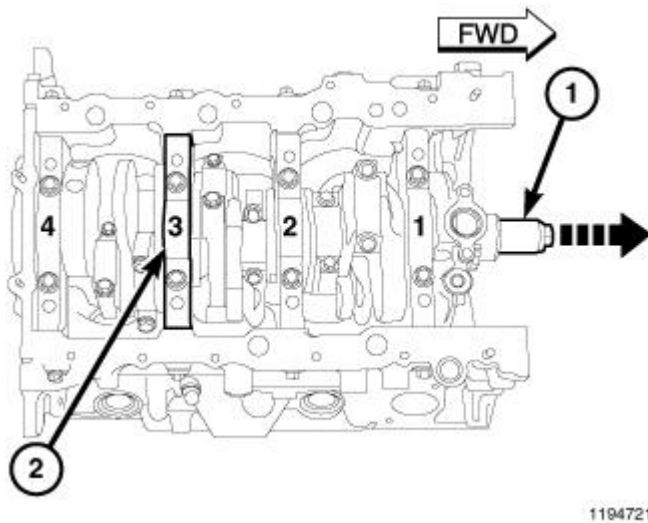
CYLINDER BLOCK AND CRANKSHAFT
